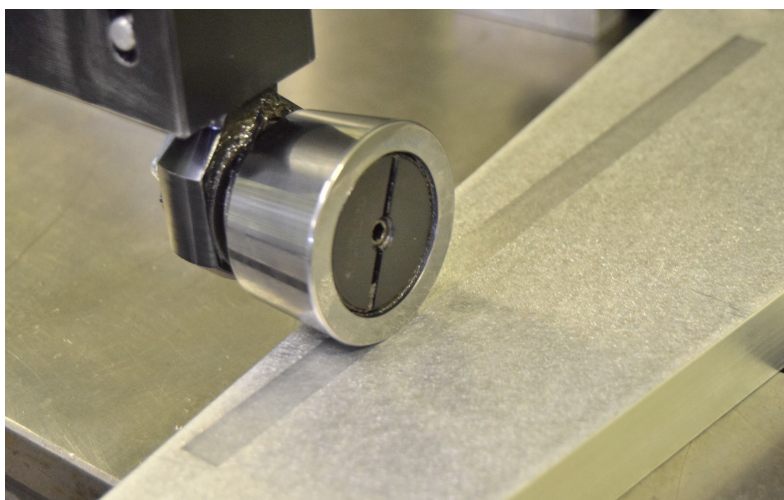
Photo taken during the deep rolling process, on a CNC machine.
